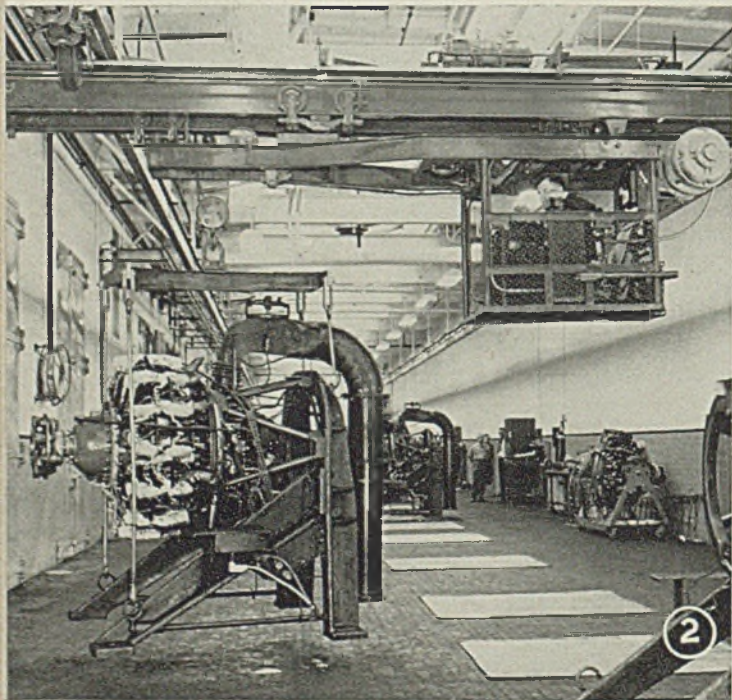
Big Buick-built aircraft engines come from the assembly lines mounted on these special stands, the wheels of which run in sunken tracks or on special rails to keep the stand traveling in line. A pan is provided to catch any parts that may be dropped during assembly operations. Note worm gear drive on end to rotate engine on the cradle to any angle desired. This facilitates assembly
